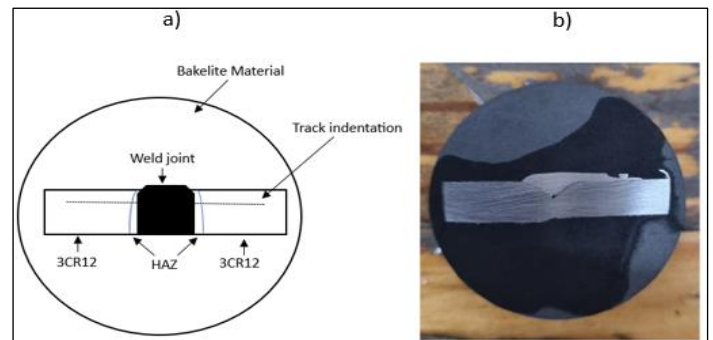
Microhardness test specimens' indentation locations (a) for MIG welded samples (b) after hot mounting.
